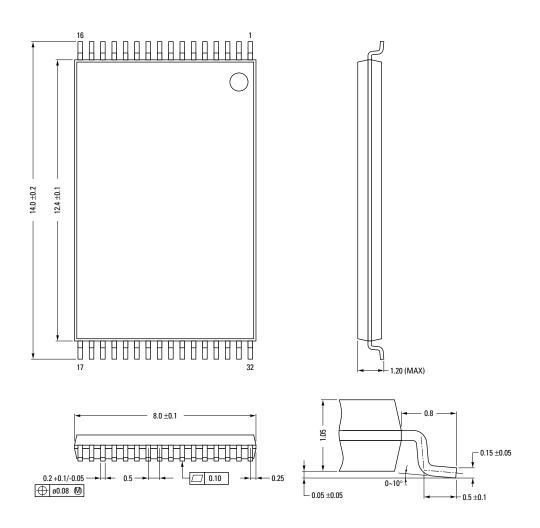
32-Pin Plastic TSOP (Type I) Package Dimensions
